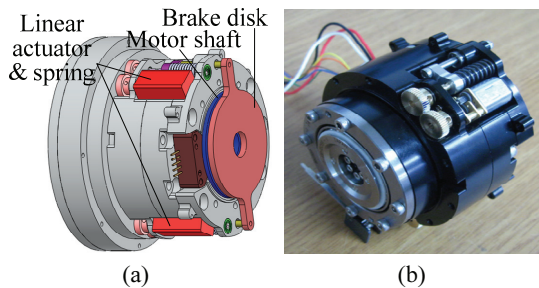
Brake module: (a) Design, and (b) Assembled in driving module
